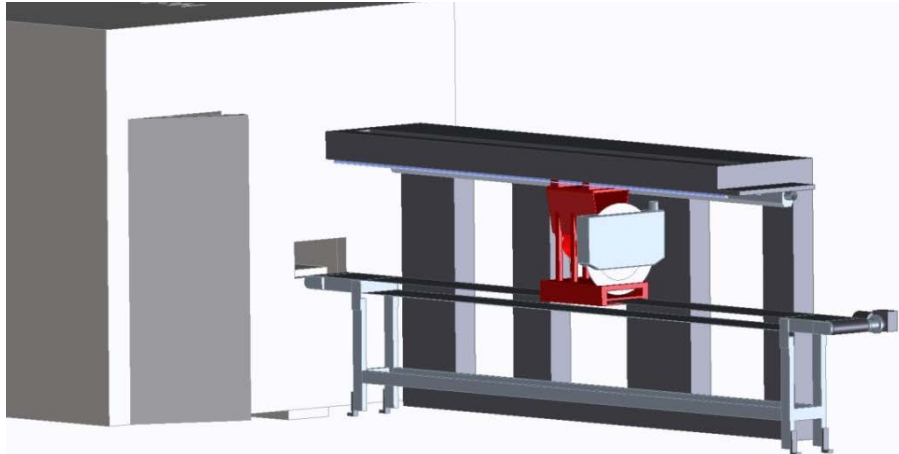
Flying saw to cut lamellas for longitudinal layers.
